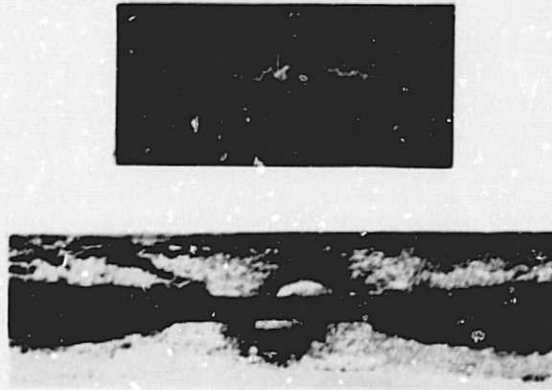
Fluorescent penetrant indications of a fatigue crack and macrograph of the fracture surface of specimen 5-2.5-0.020-9 at 10X.
